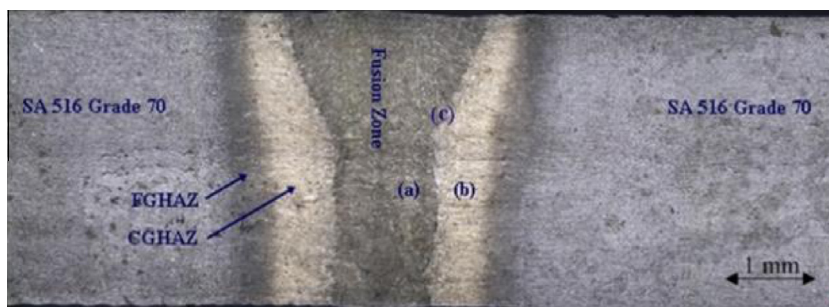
Macrostructure of the fusion zone, heat affected zone and base metal of welded sample.
